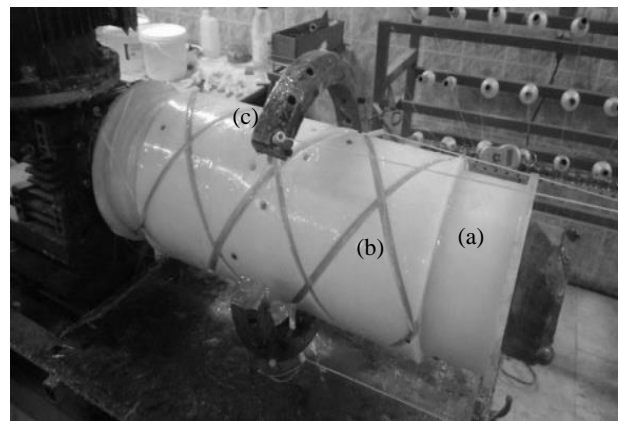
Filament winding process (a) polyethylene mandrel (b) silicone mold (c) filament winding
